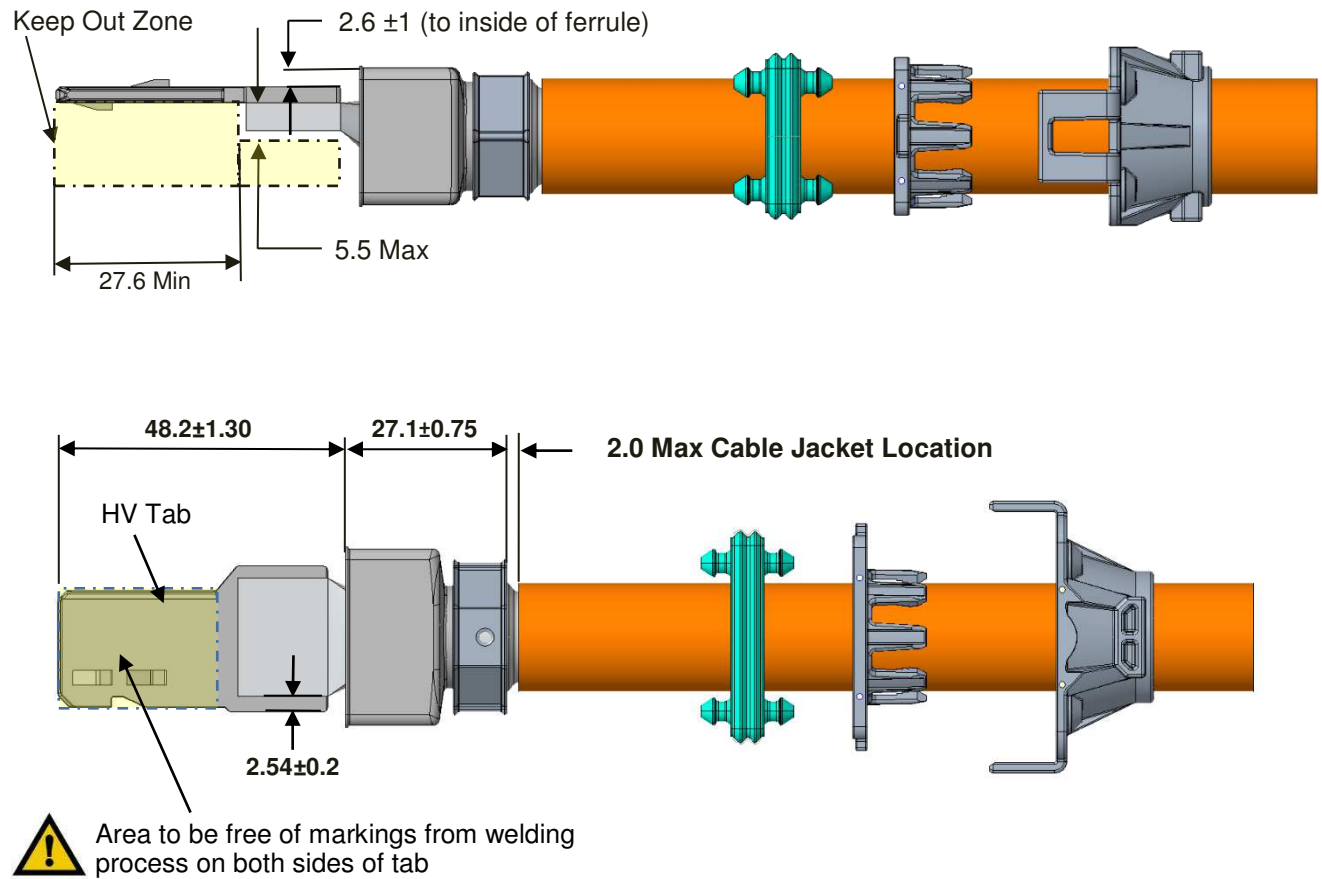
HV Tab ultrasonic welding terminal cavity 2
